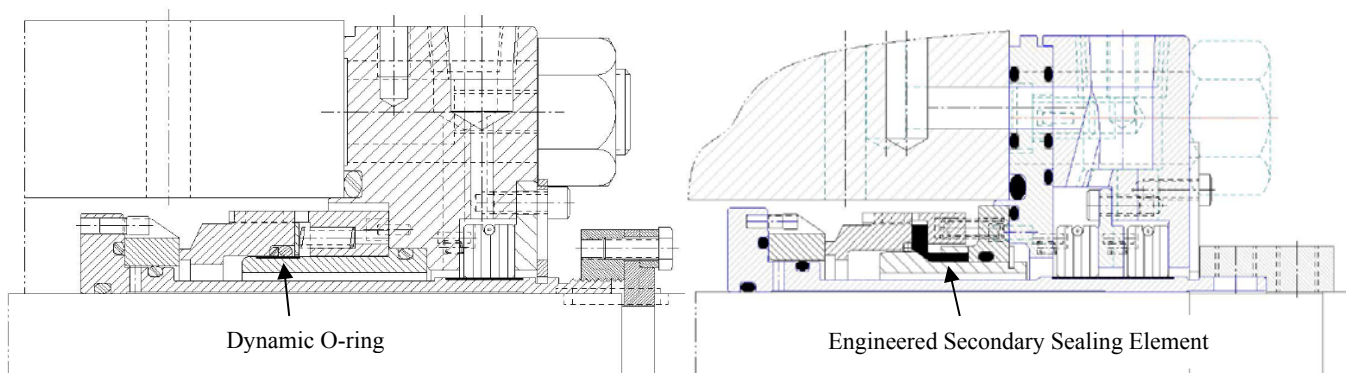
Type A with API Piping Plan 11/65 (left); Engineered Seal with API Piping Plan 11/66A (right)
